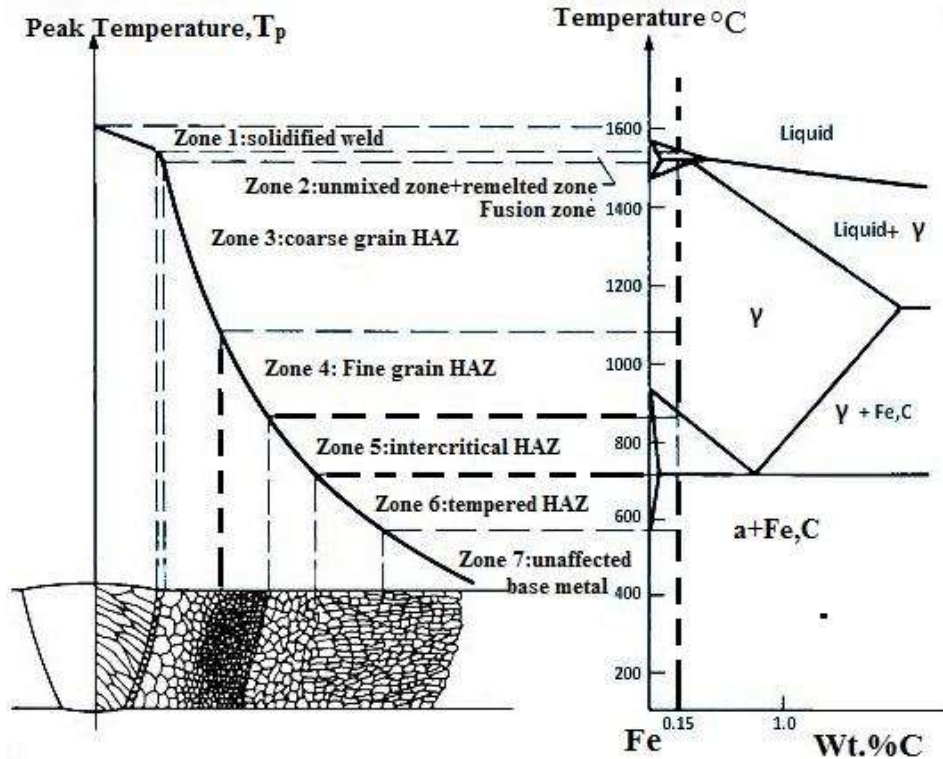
Schematic diagram of the different zone in a heat affected zone of a low carbon steel weldment [65]
